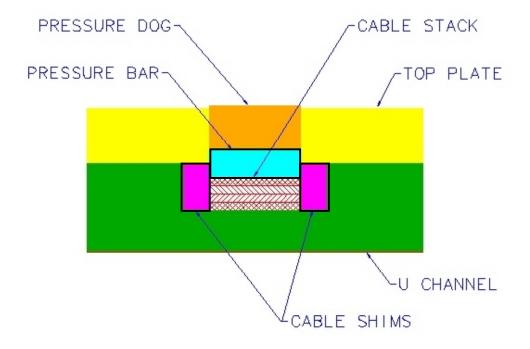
Cross section view schematic. Shim adjustment screws, Cu splice box, and assembly screws not shown.
